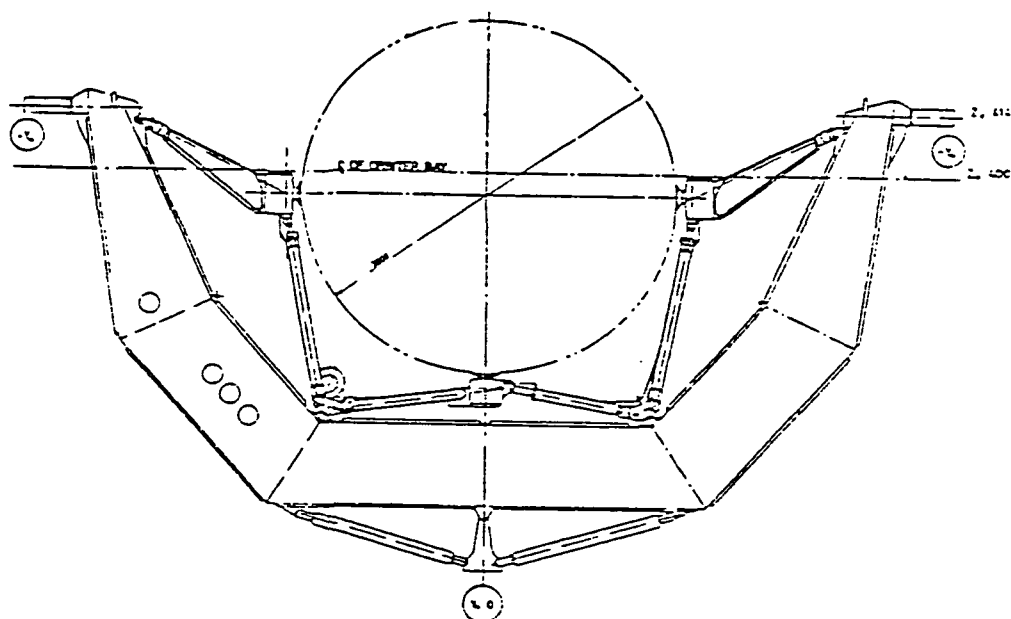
IPS PAYLOAD CLAMP ASSEMBLY
